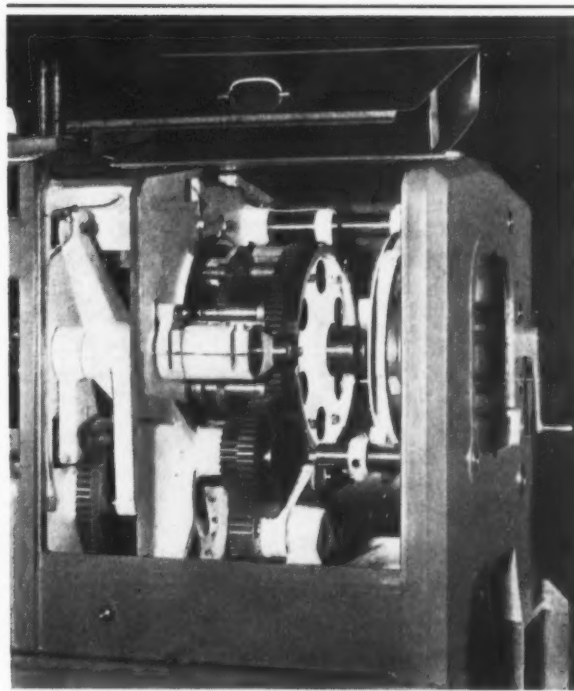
The Spindle Carrier Mechanism and the Other Units of the Machine are Made Accessible by Simply Raising Sheet-metal Guards
